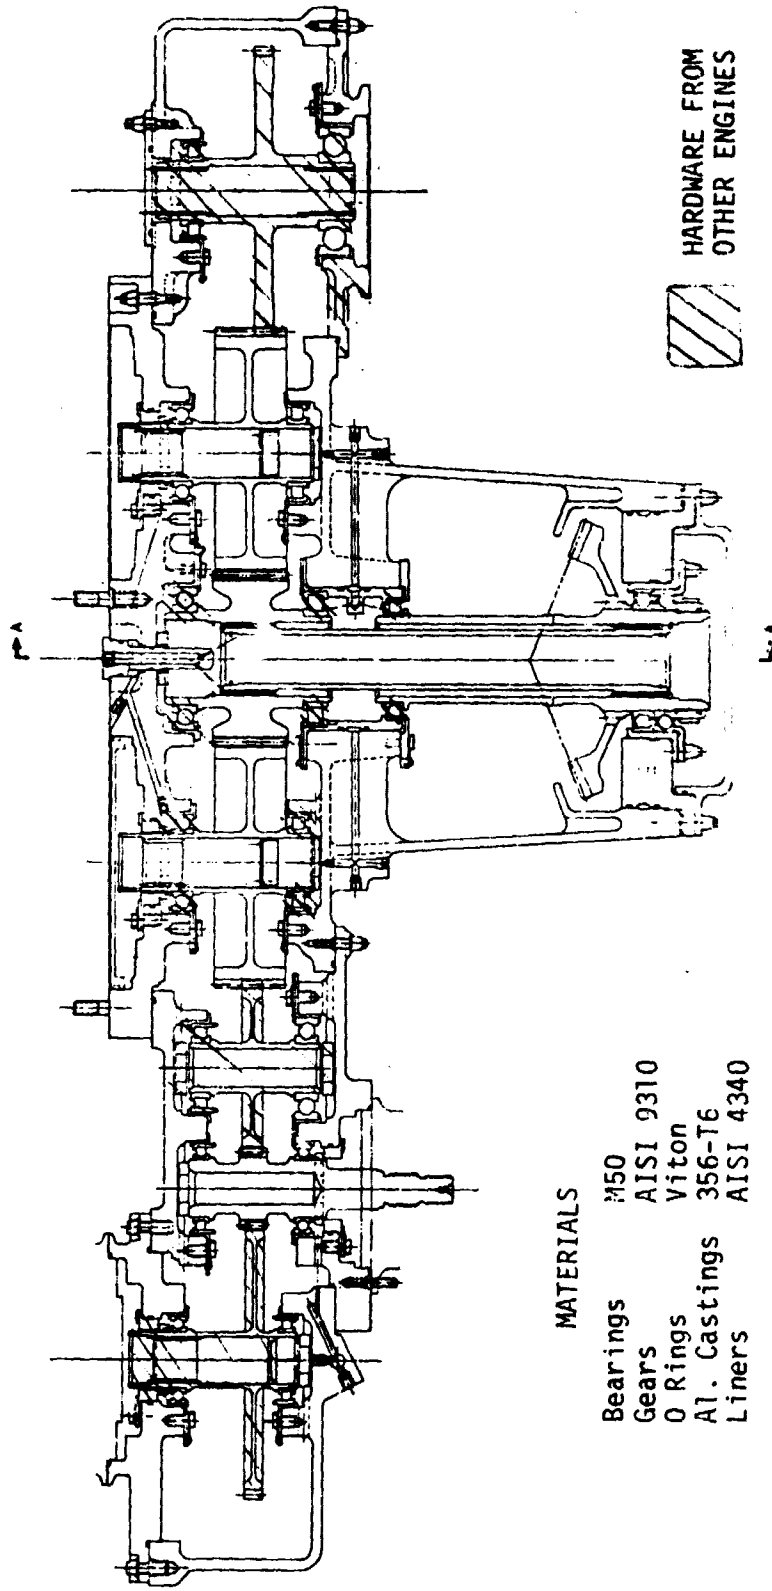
Core/ICLS Accessory Gearbox.
